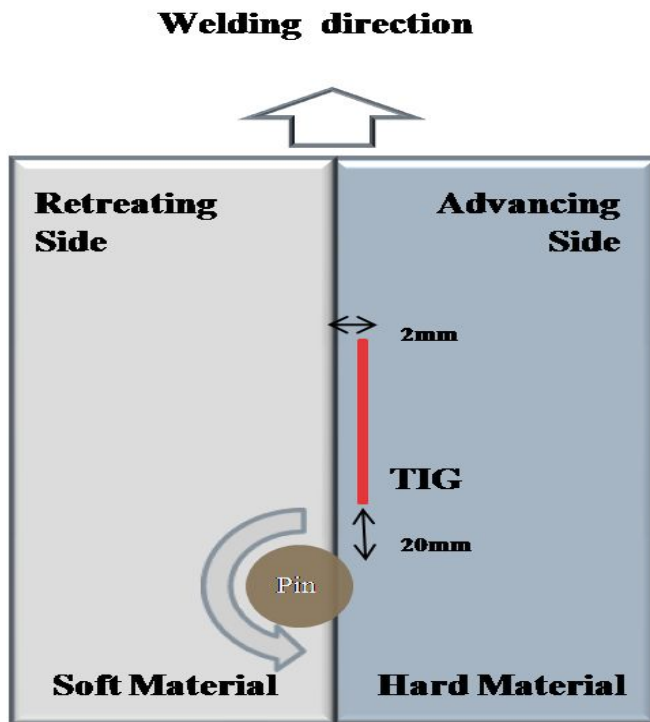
Welding configuration for TIG assisted hybrid FSW process
